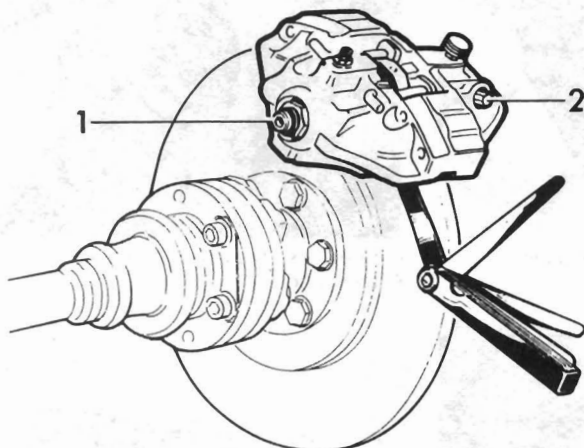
Checking rear disc pad clearance (Sec 4)
